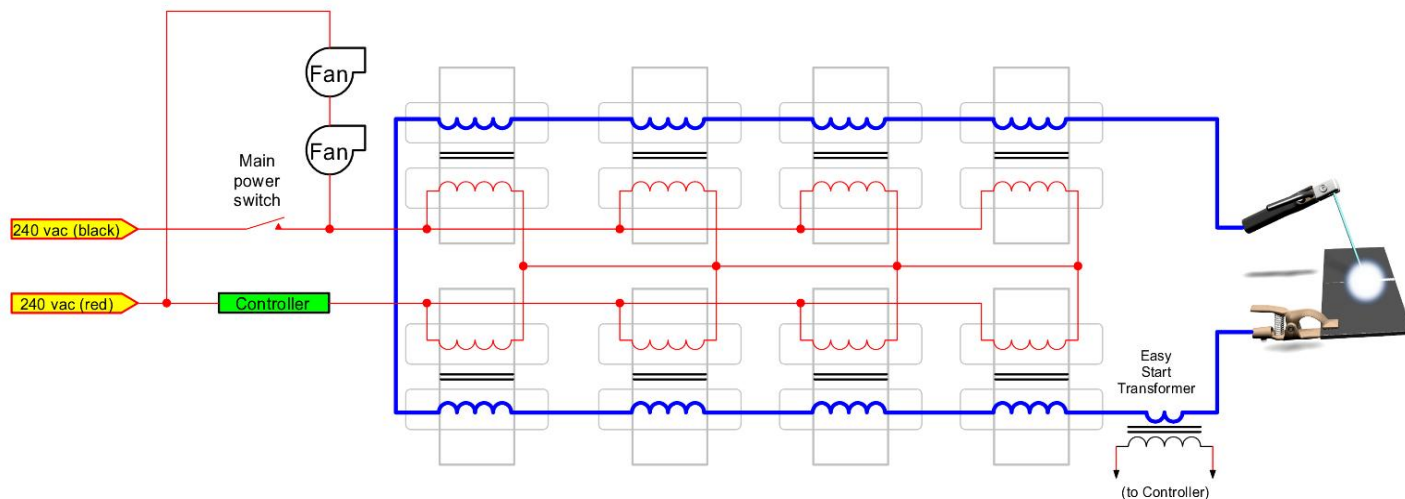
240 volt, 8-transformer welder. This is the first one I built. It requires a 50-amp 240 volt circuit to operate.
